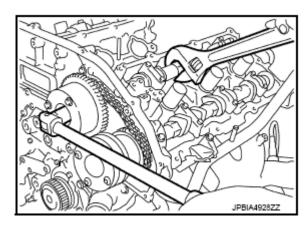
Removing Camshaft Sprocket (INT) Mounting Bolt Courtesy of NISSAN NORTH AMERICA, INC.
